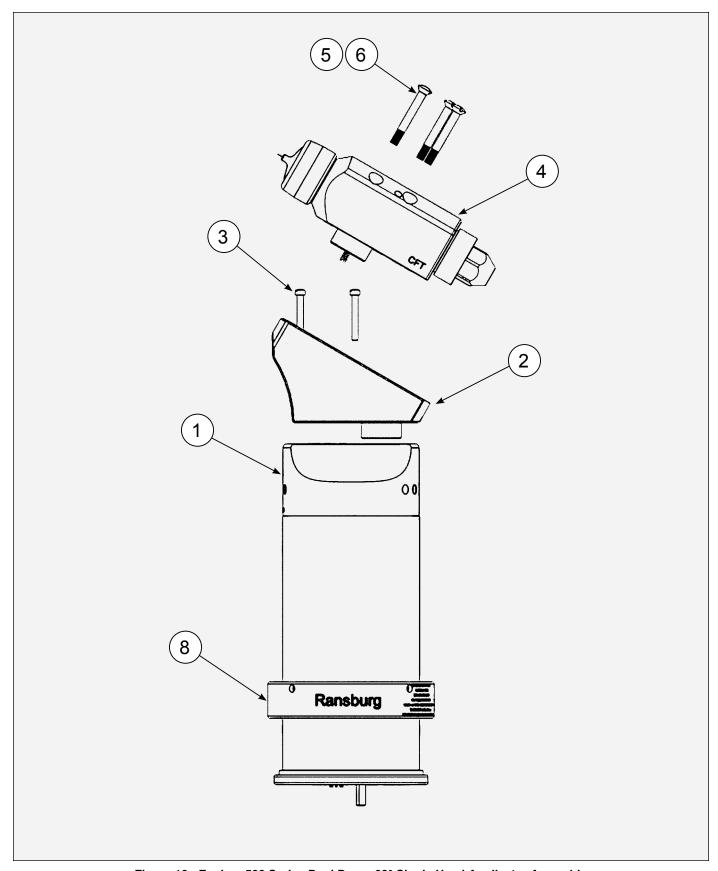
Evolver 500 Series Dual Purge 60° Single Head Applicator Assembly
